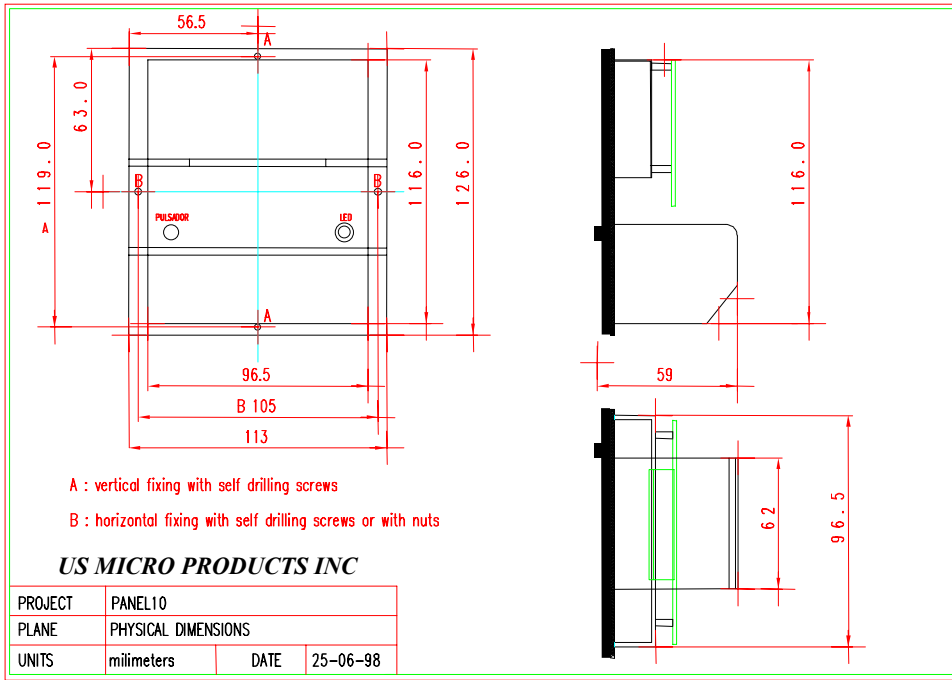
Physical dimensions for PANEL – 10 impact printers (normal chassis).
